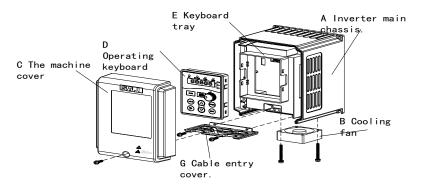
Converter composition (0.75kw-7.5 kW, including 11kW P type machine)
